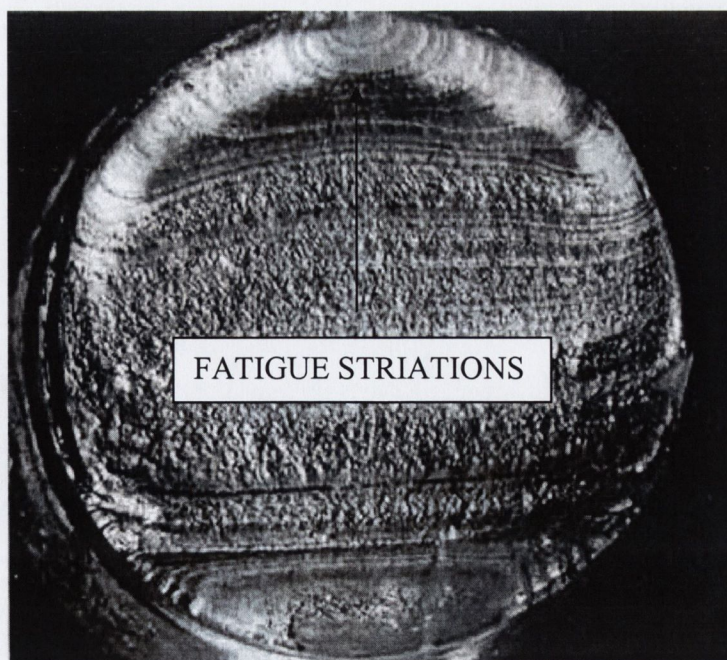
Fracture surface attributed to fatigue failure [75].
